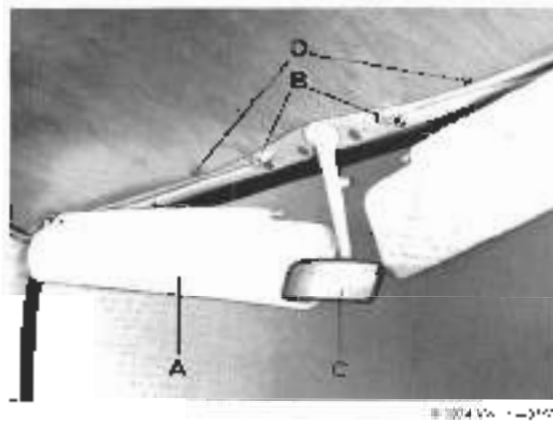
Sun visors A, retainers B, rear view mirror C, and Phillips head screws D.
